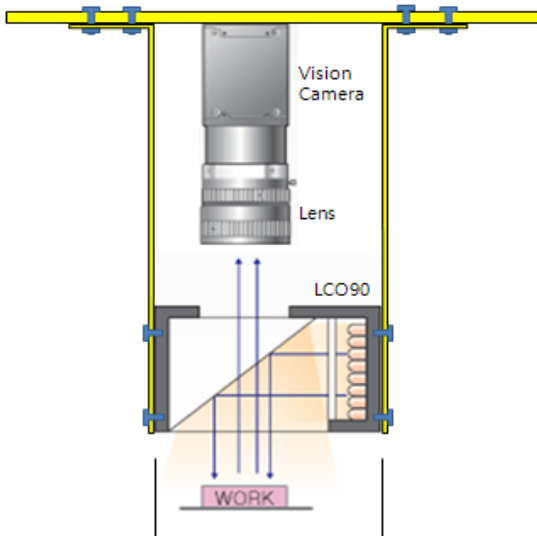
Apparatus used for automatic drawing conformity inspection.
